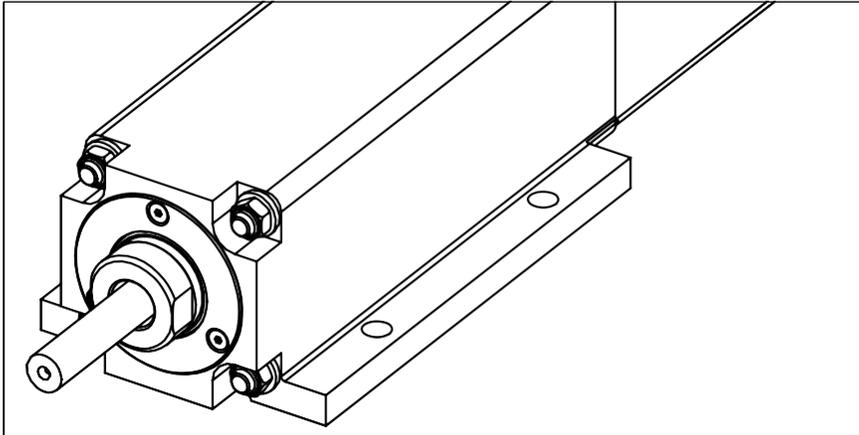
The design of the GSWA33 Guided includes this assembly that has these functions: anti-rotation device, mounting device, side load support.
